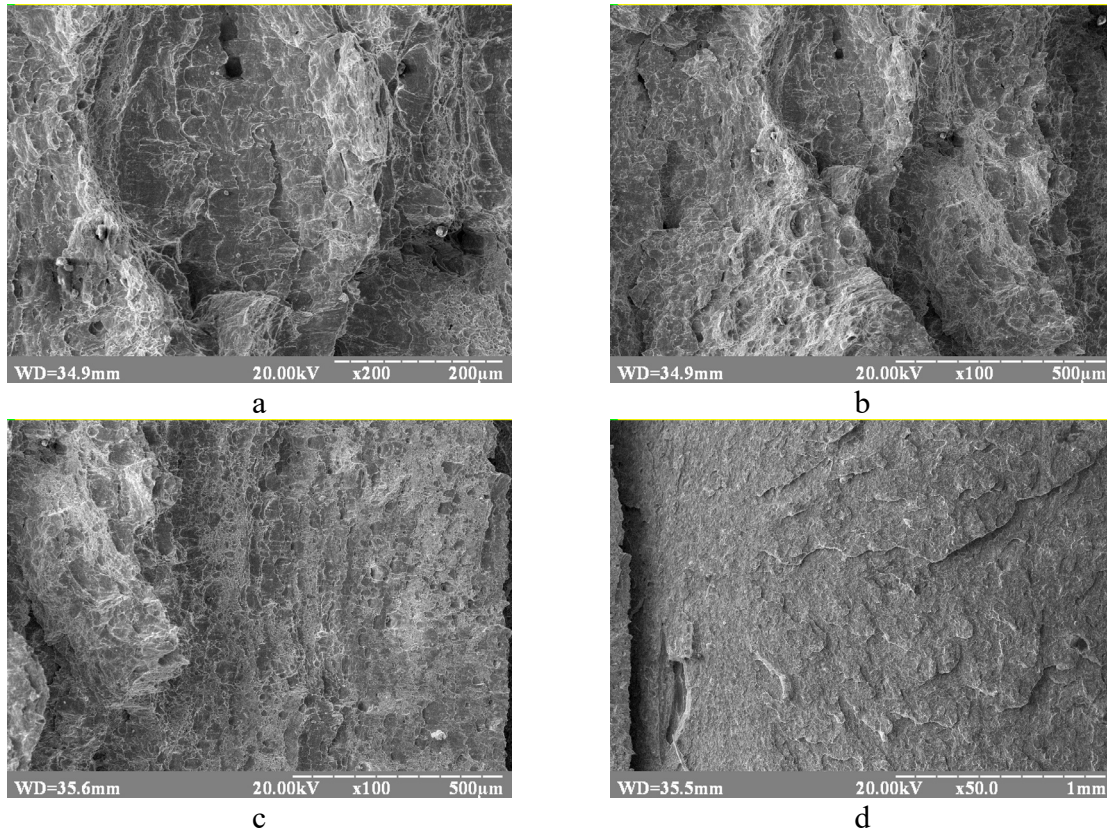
Fractography of fracture at $-40\text{ }^{\circ}\text{C}$: a - the left part of the fracture (10% B); b - the left part of the fracture (image shift down) (40% B); c - the left part of a fracture (shift of the image to the right) (25% B); d - the right part of the fracture (5% B)
